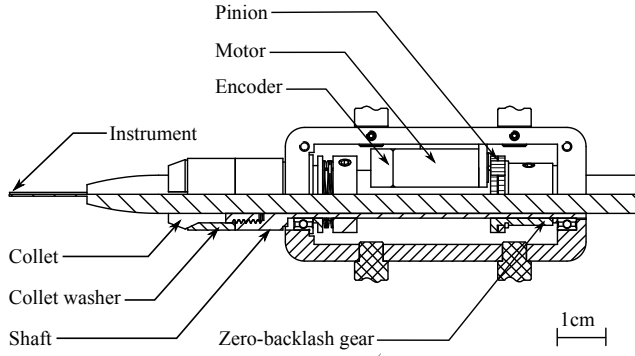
View on the inside of the ψ -module. The lower part shows a cross-section view through the instrument axis. The mechanism consists of a ψ -drive mechanism and a collet clamping mechanism.
